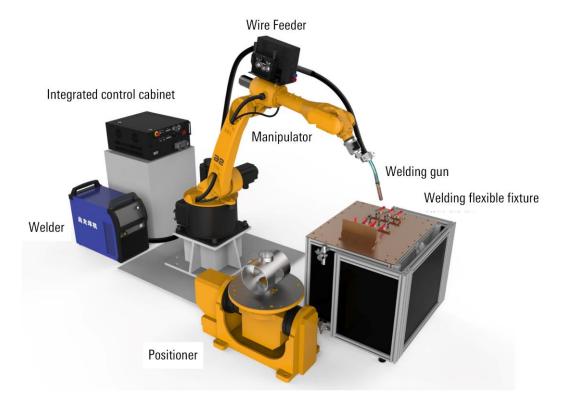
AIR series industrial robots can be combined with positioners to form an arc welding system diagram
